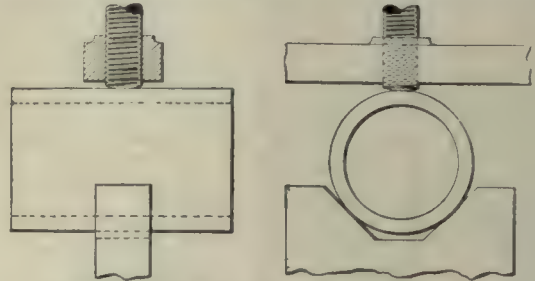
IMPROPER METHOD OF CLAMPING A BUSHING FOR TOOLING
